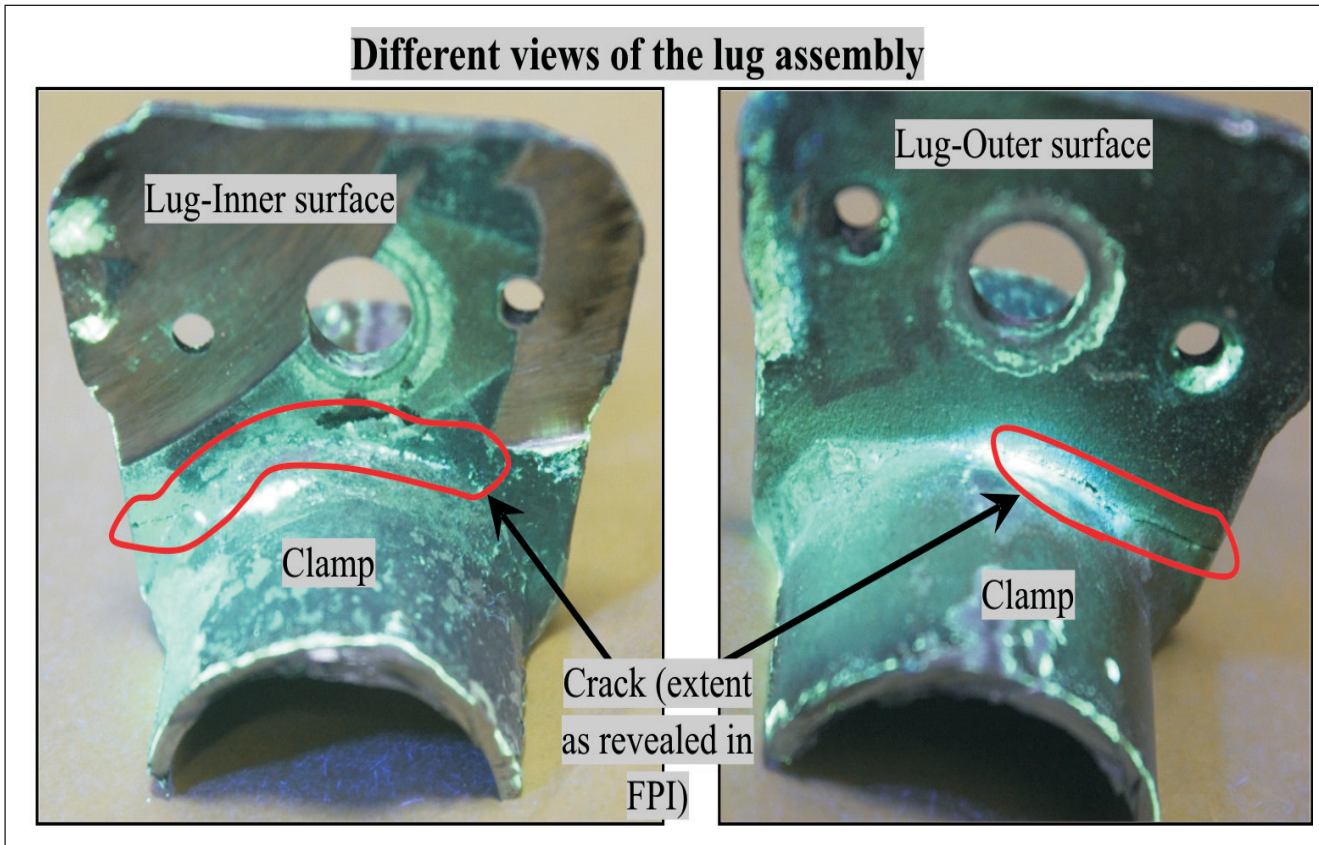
Extent of crack in the lug-assembly as revealed in FPI
